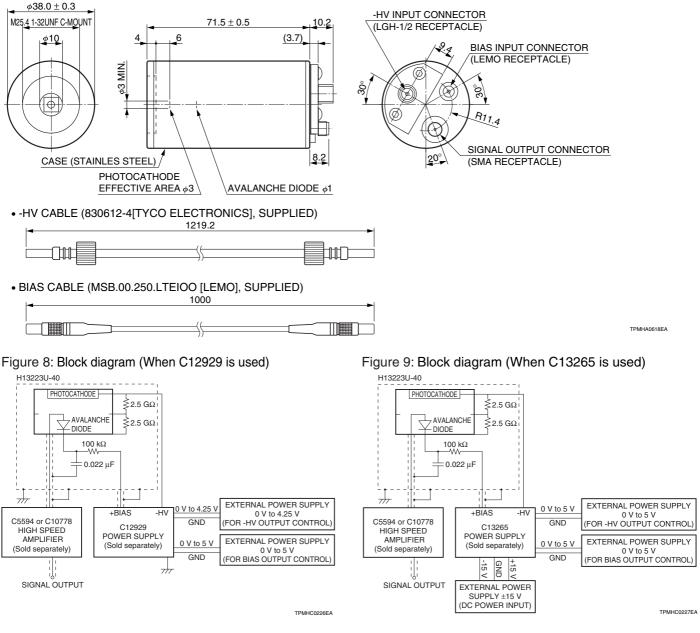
Dimensional outline (H13223-40) (Unit: mm)
